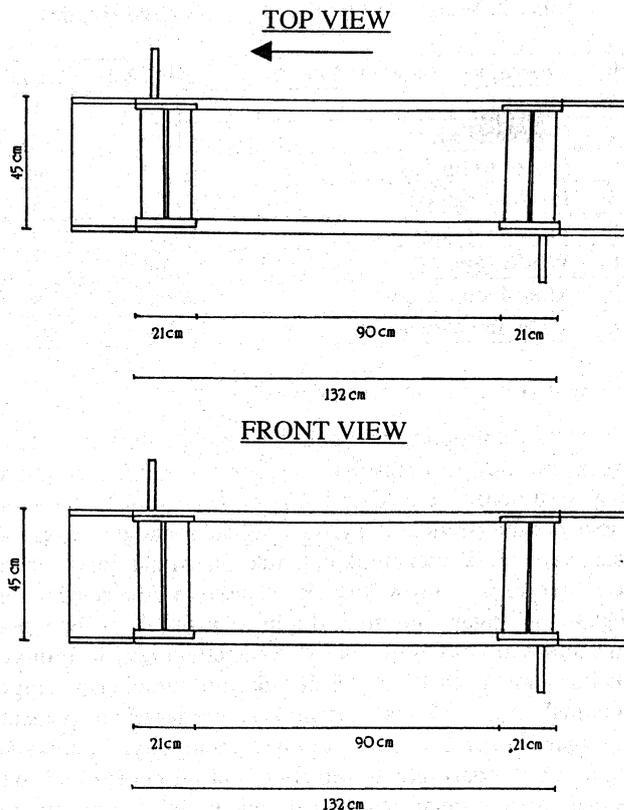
b. The Type of Machine Which is Designed (Top View And Front View)
